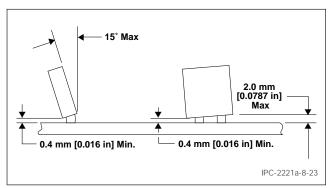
Radial Two-Lead Component Mounting, mm [in]
